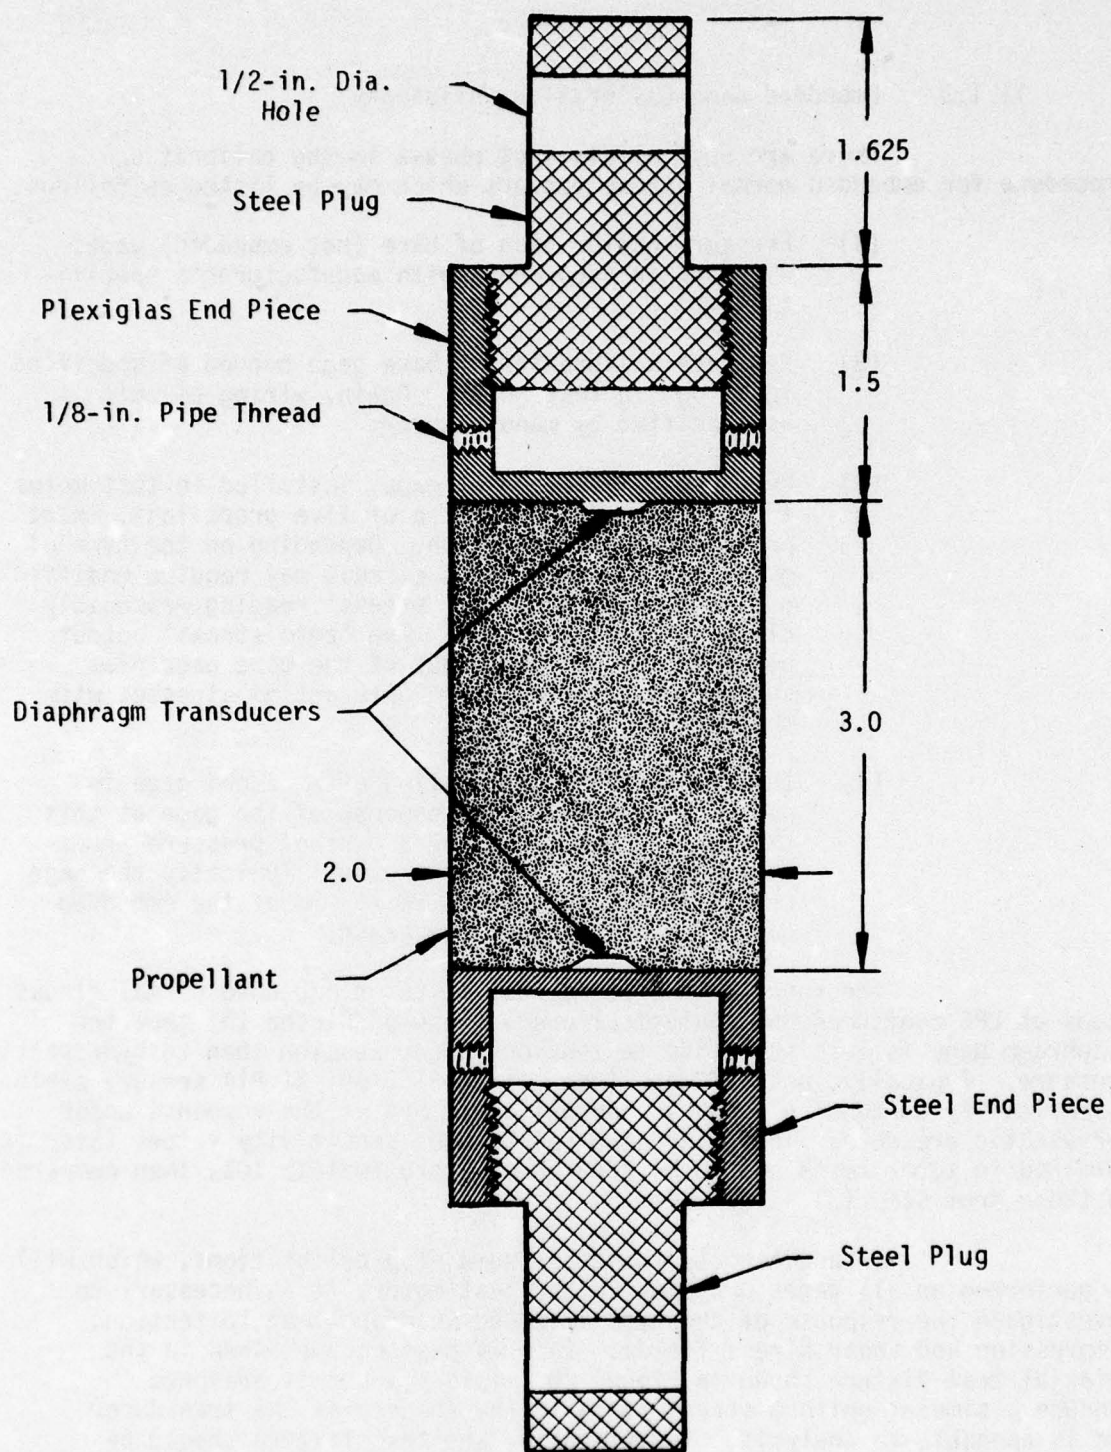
UNIAXIAL CALIBRATION TEST FIXTURE
